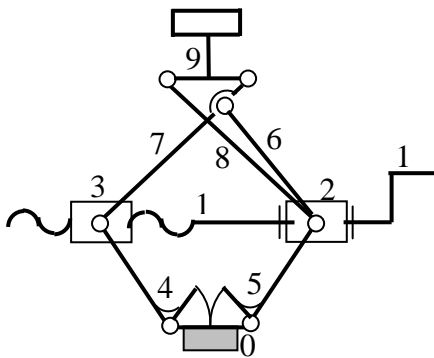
Lifting mechanism with screw, articulated bars and a cylindrical gear
